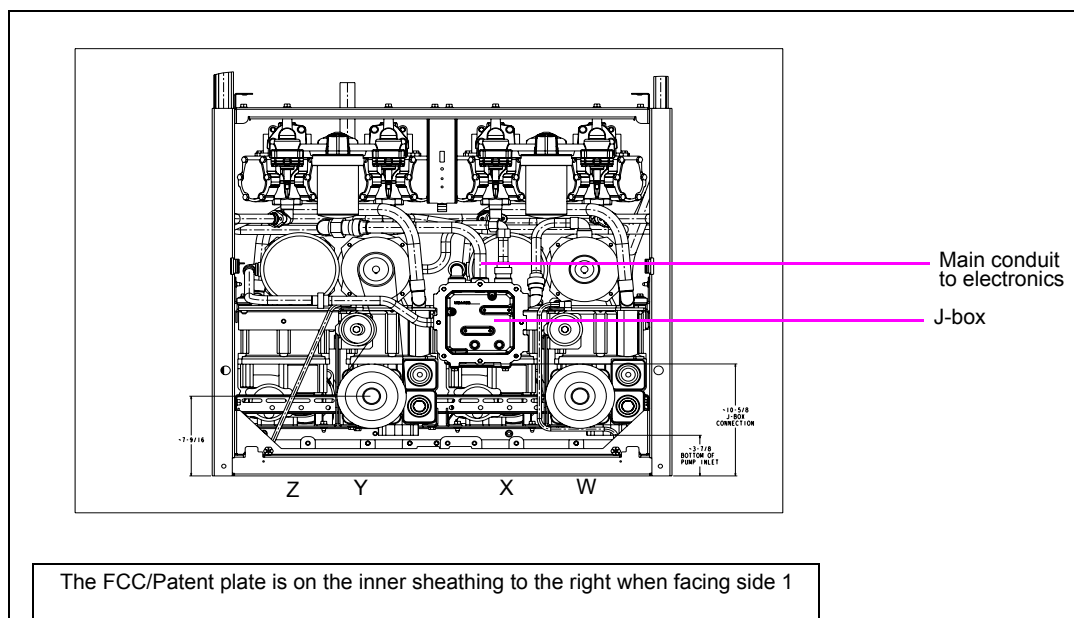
Encore dispenser Ultra-Hi Piping to Hose Fitting Layout
